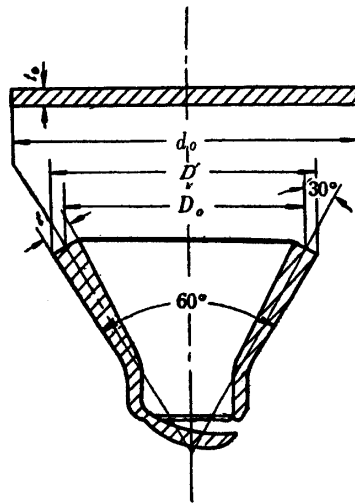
Test piece at the instant of fracture at the shell bottom.
